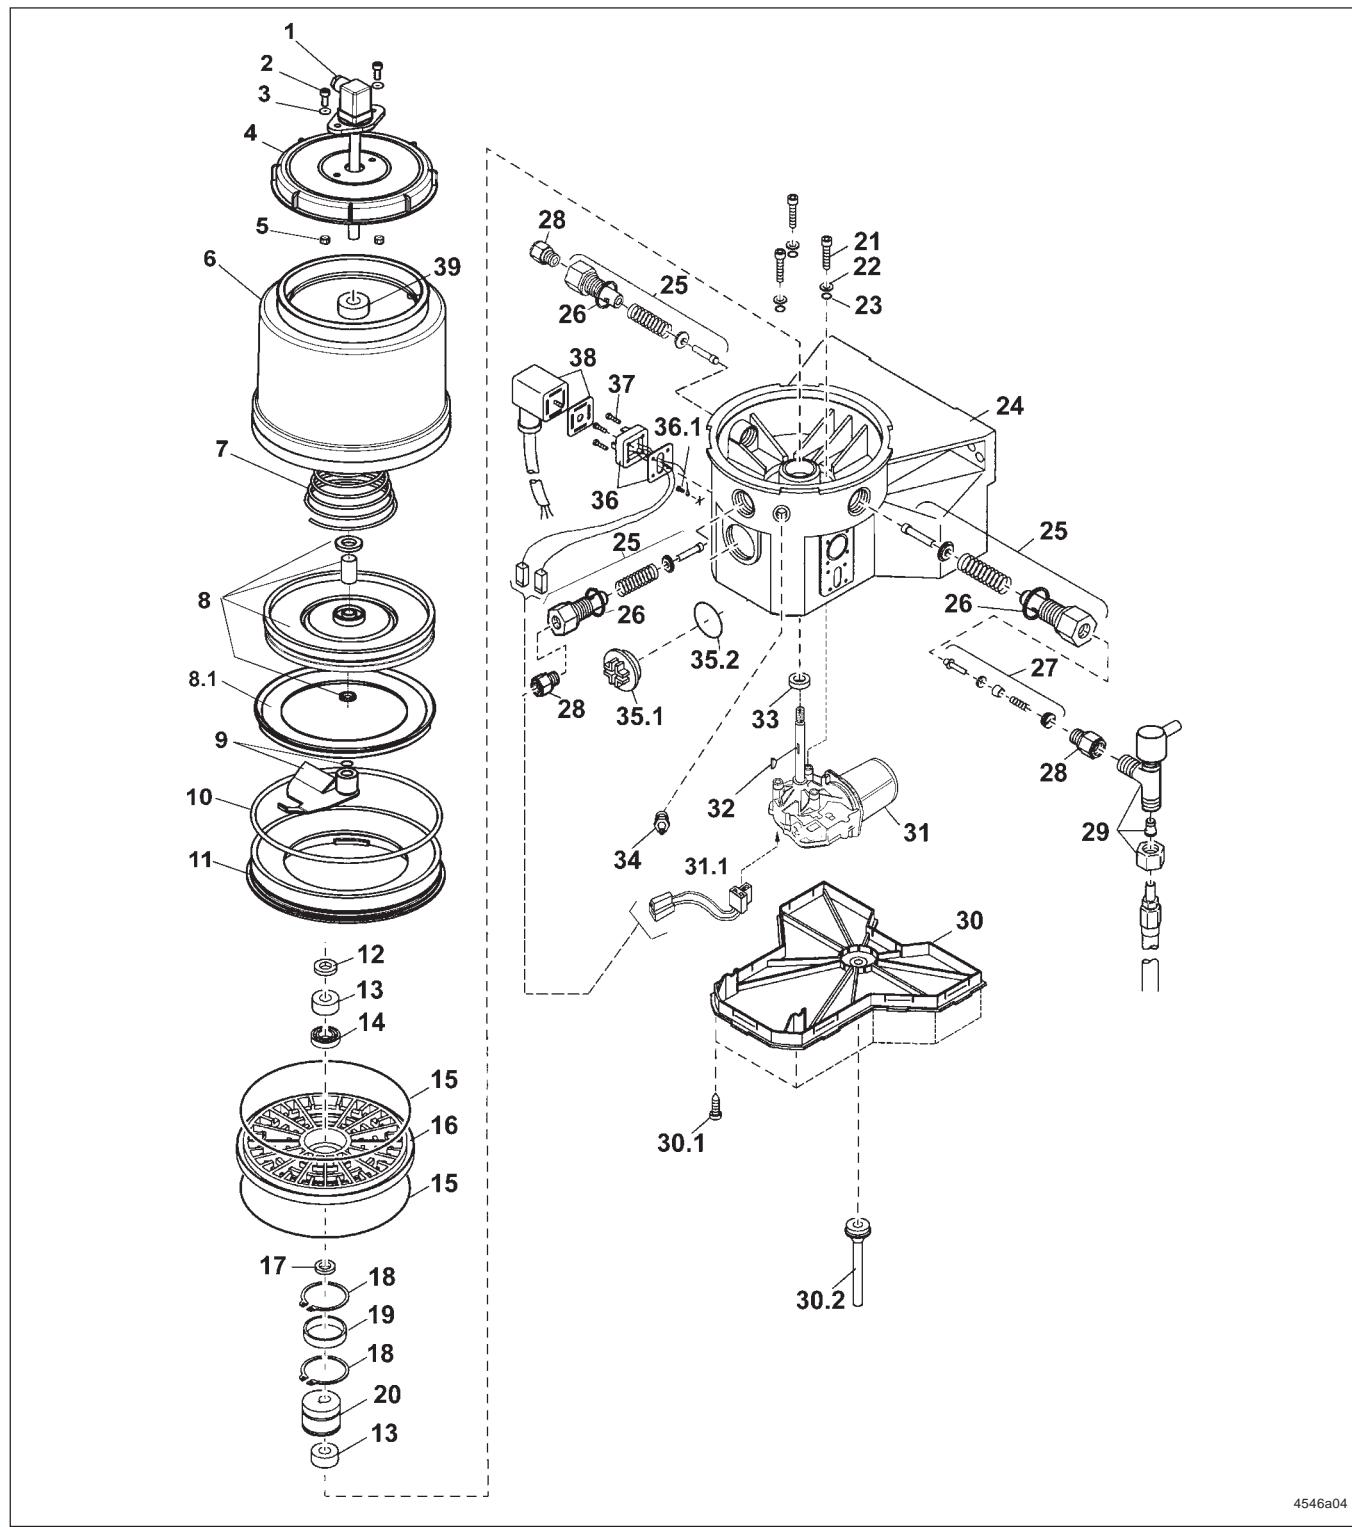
Explosion view for P 203-4XBF-3K-12/24-1A1.10
